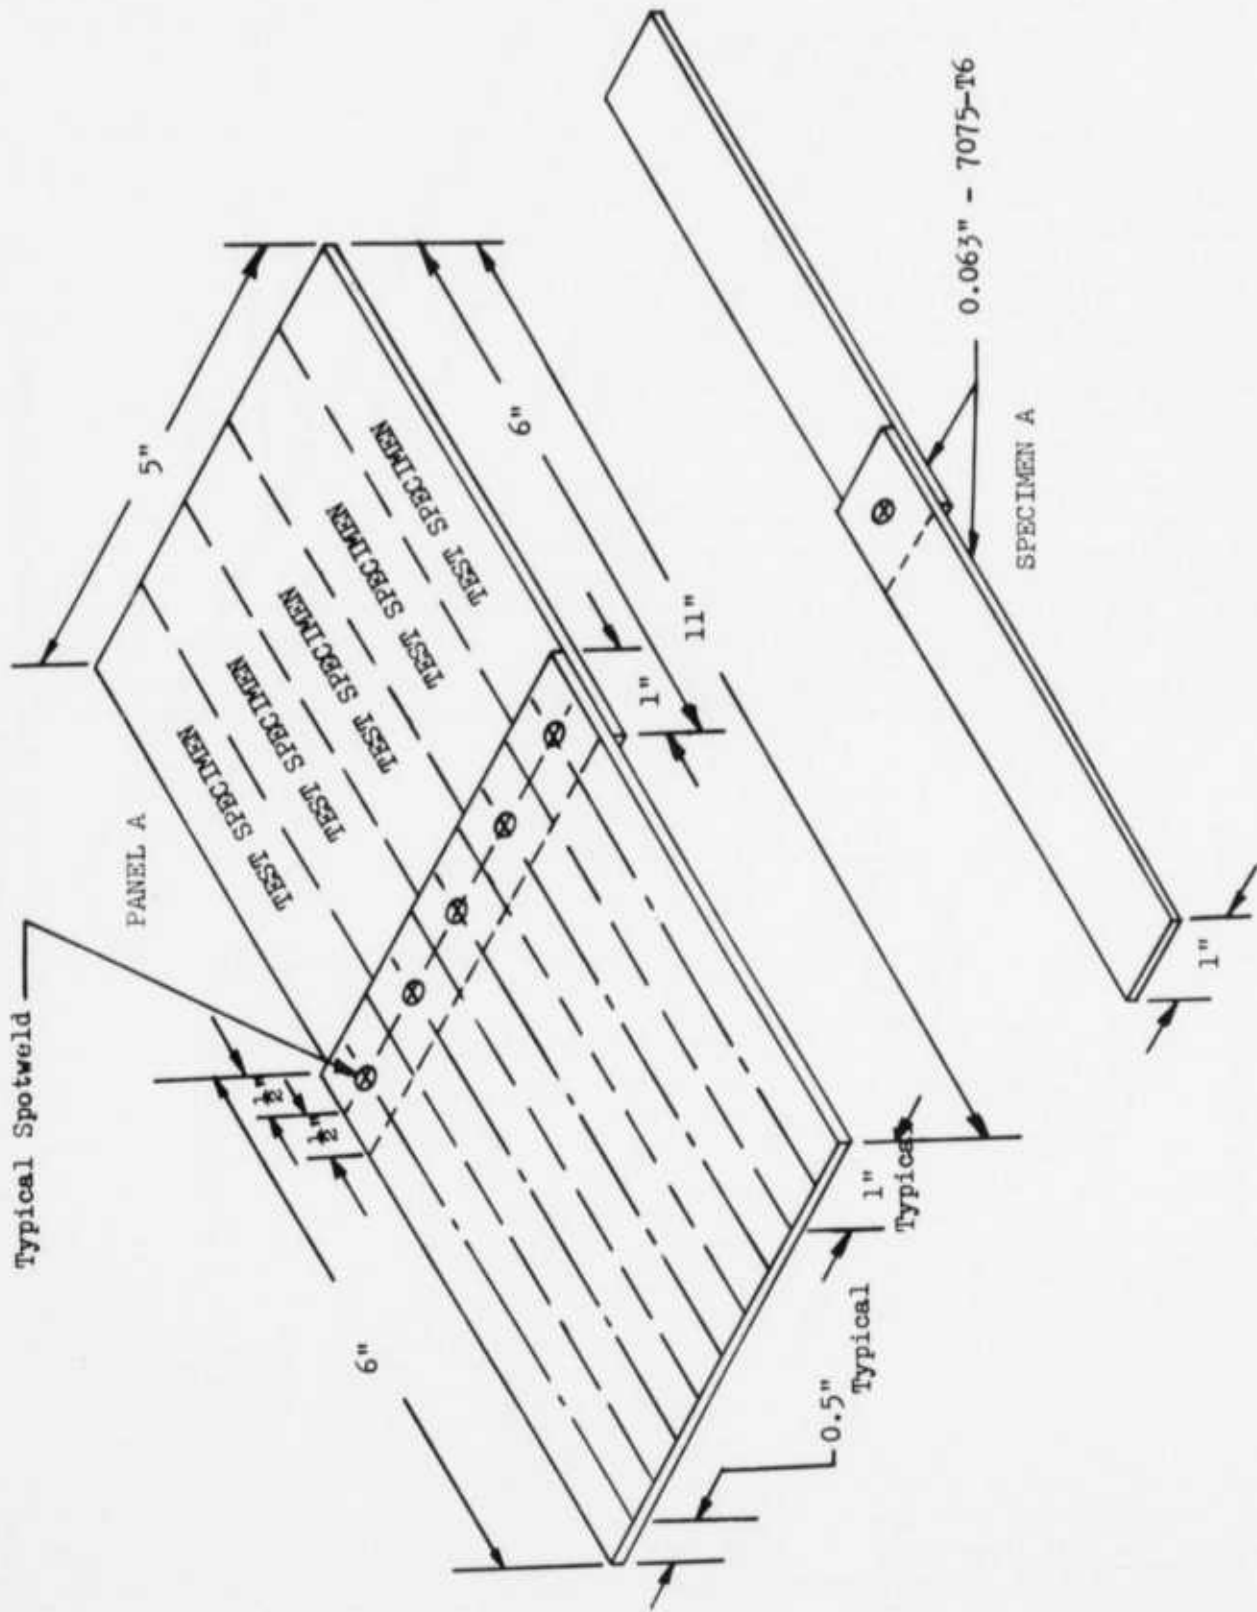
LAP SHEAR (W/SPOTWELDS) TEST PANEL AND TEST SPECIMEN
